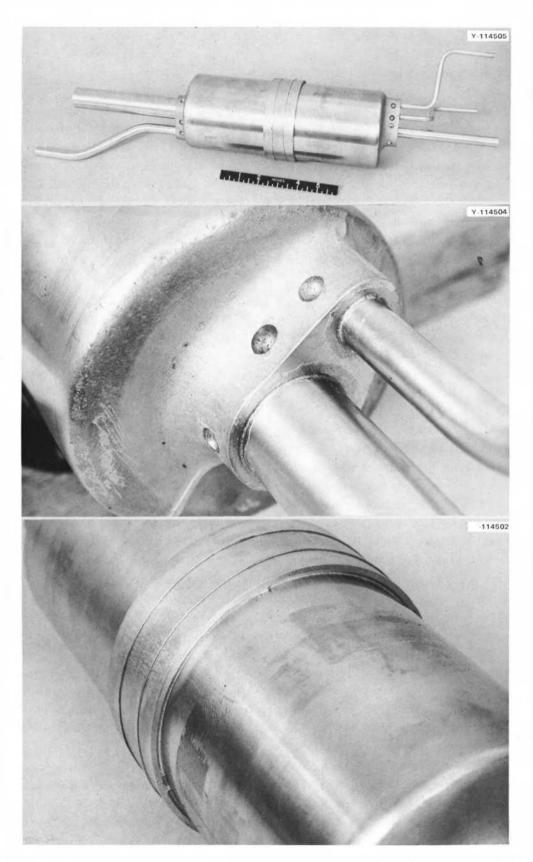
Molybdenum pot after back-brazing of tube-to-header joint and brazing of ring around cylindrical girth weld.
